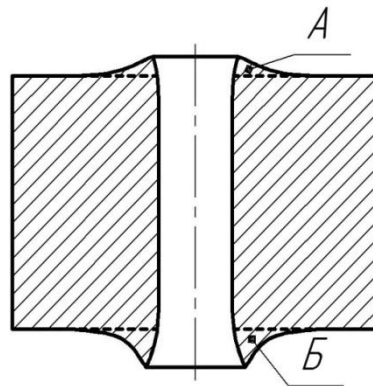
Scheme of metal flows at the ends of workpieces treated by the burnishing
